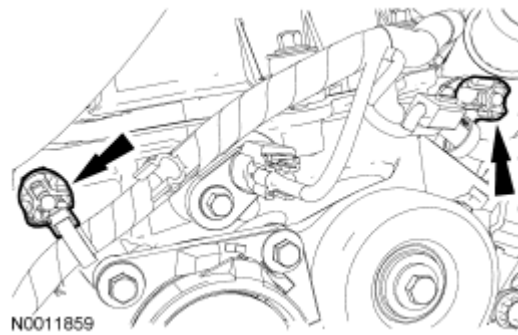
Locating Engine Wiring Harness Pin-Type Retainers
